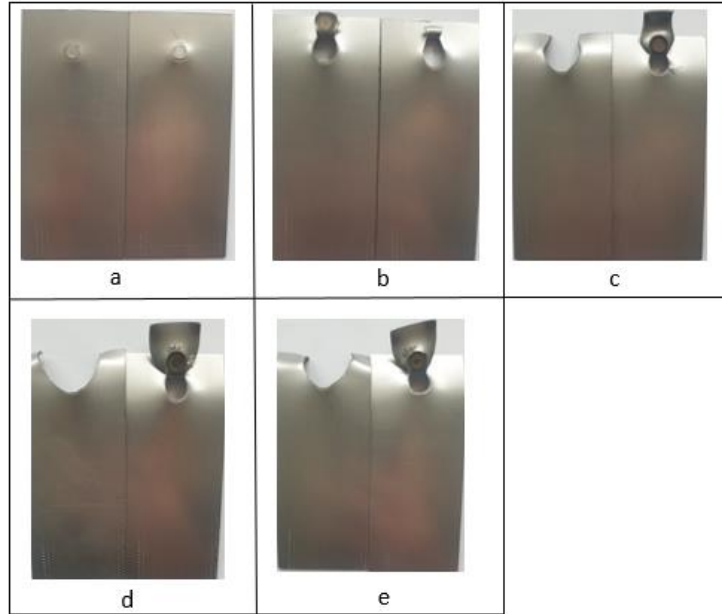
Fracture type of single pulse welding, a)8 kA b)9.5 ka c)10 kA d)11 kA e) 12 kA
